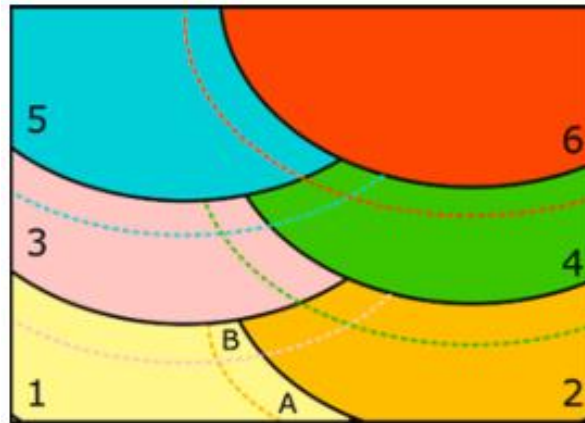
Schematic representation of a multipass weld.
